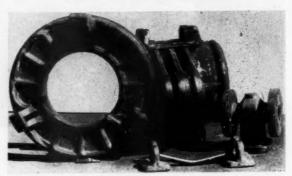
Clutch plate, railway axle sleeve and high pressure valve body.
